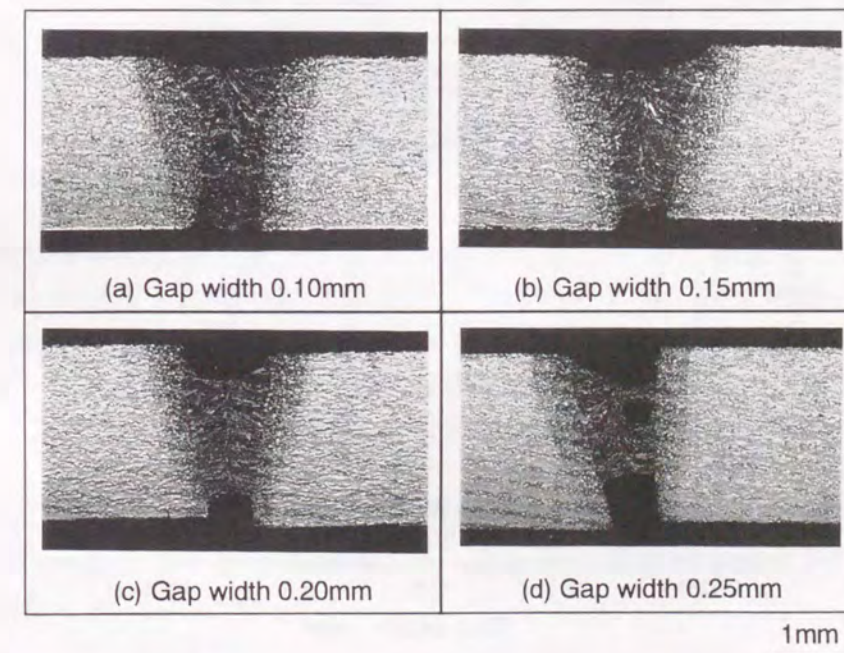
Transverse macrosection of weld metal (Sheet thickness 1.2mm)
